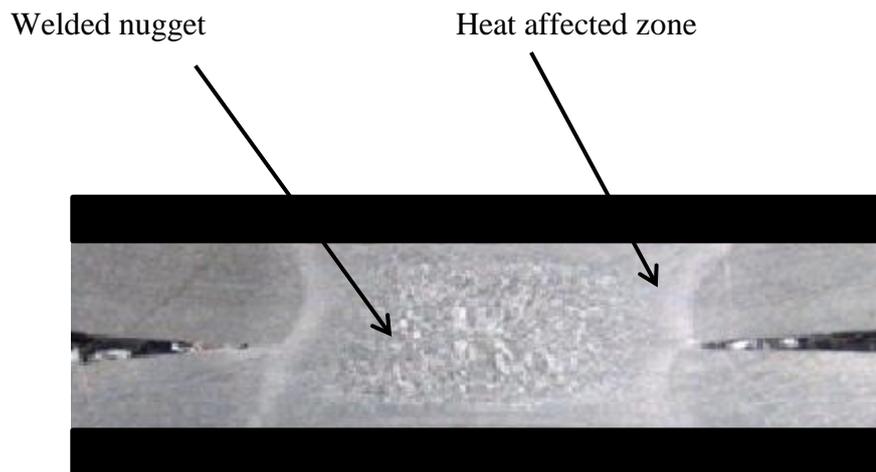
Examination of Spot Weld Nugget [42]
